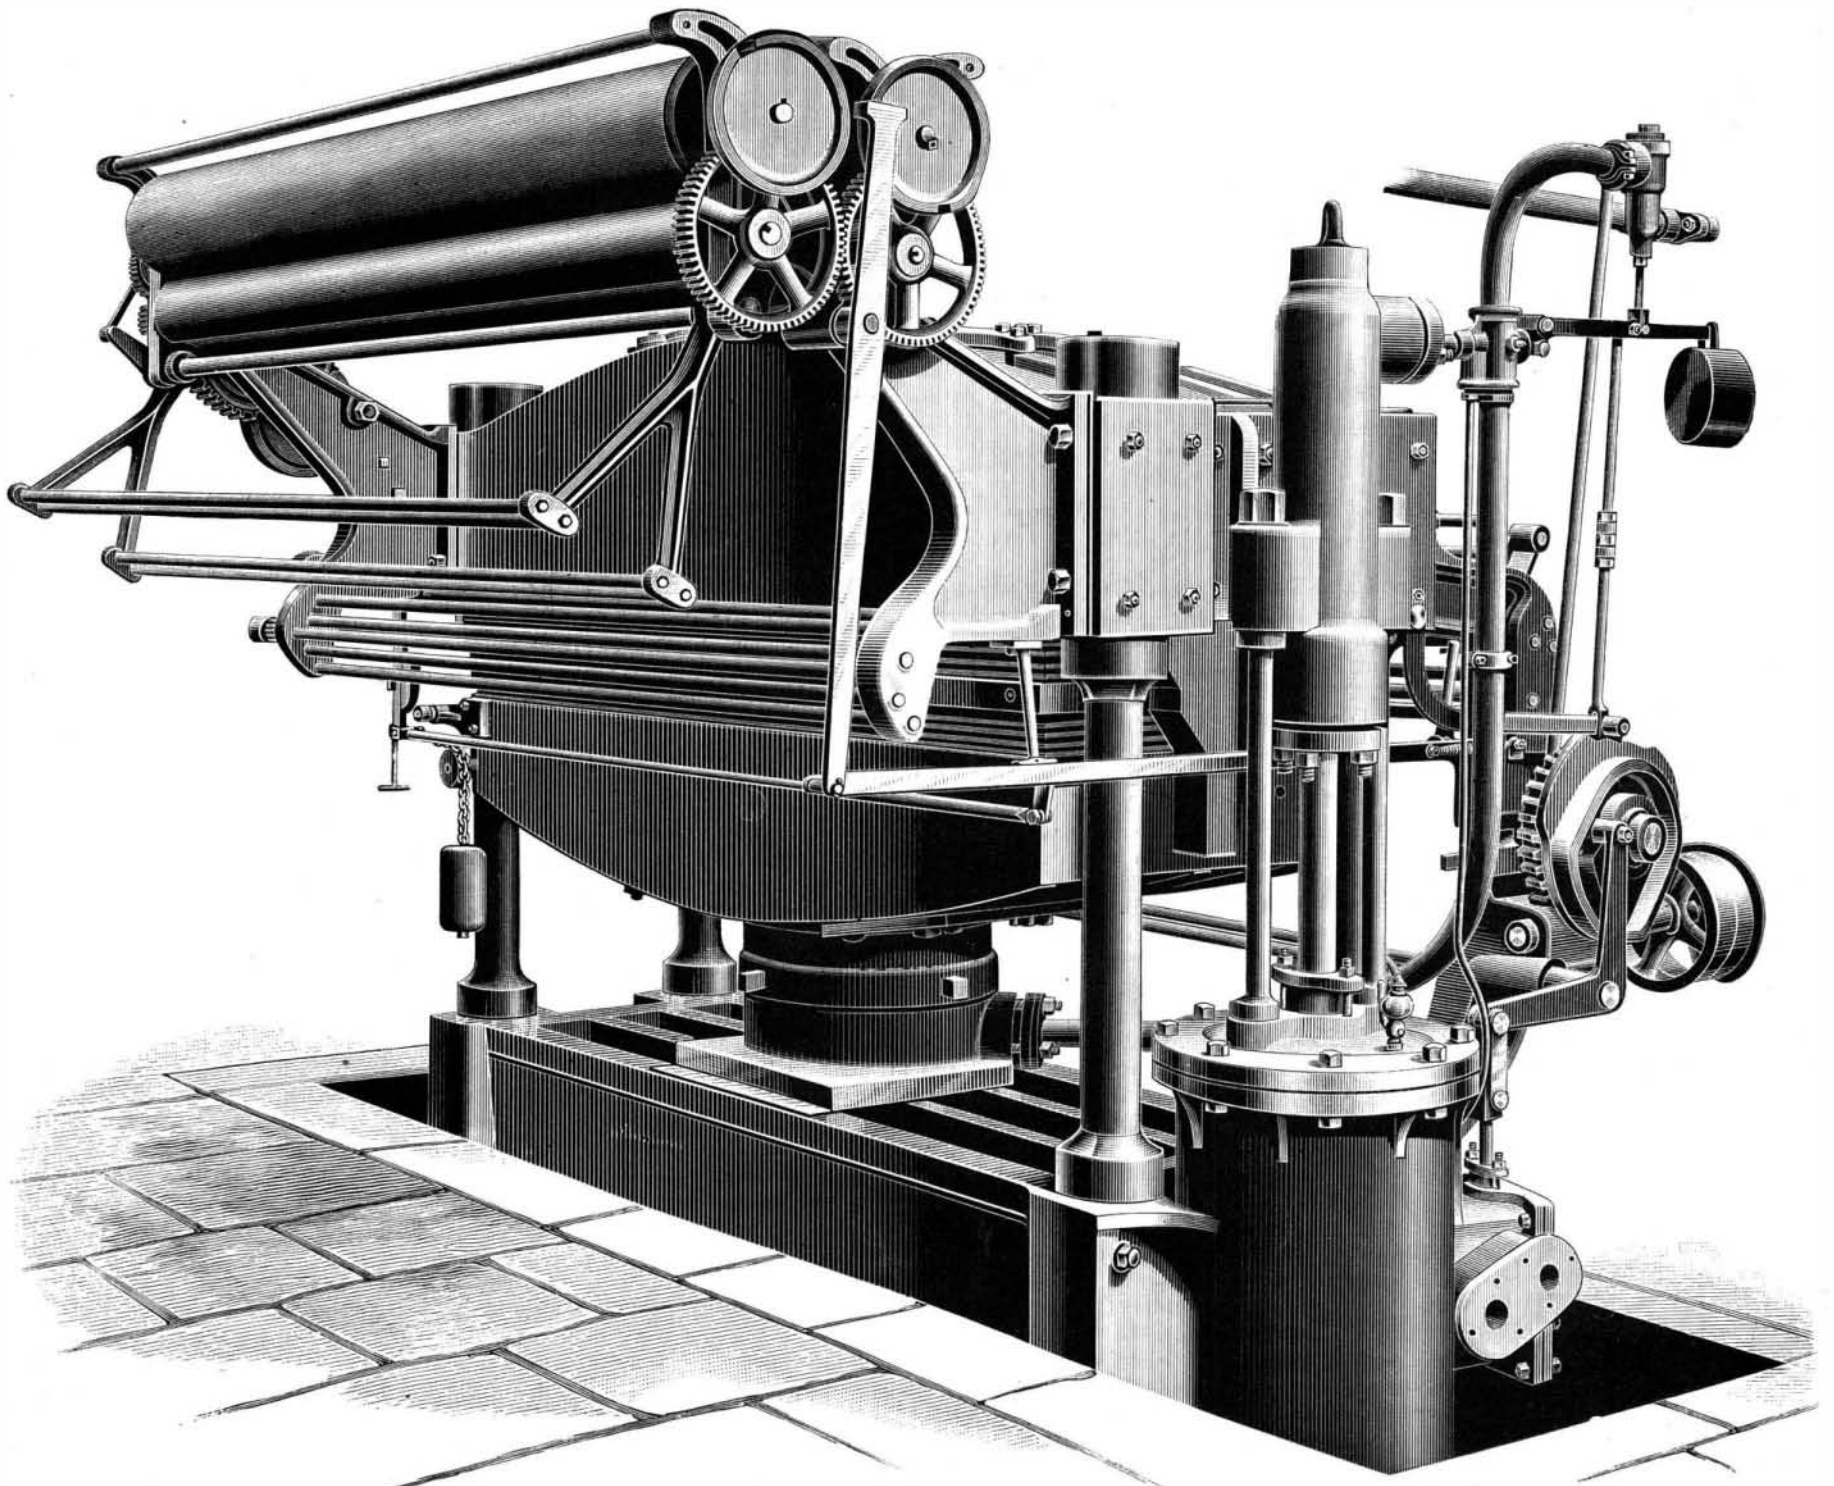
IMPROVED CLOTH PRESSING MACHINE.
